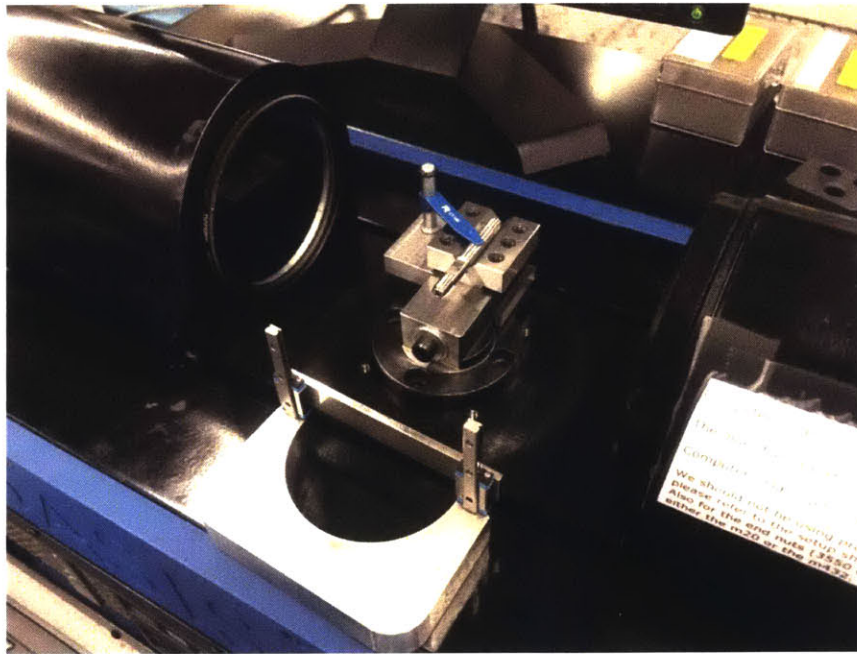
OASIS Inspection System: the optical transmitter and receiver, the column and fixture.
